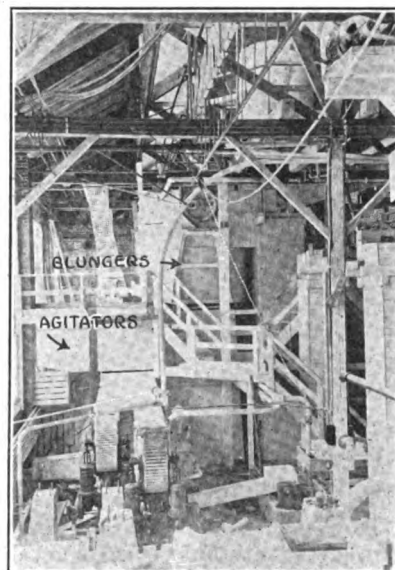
GENERAL VIEW OF SECTION OF SLIP HOUSE
